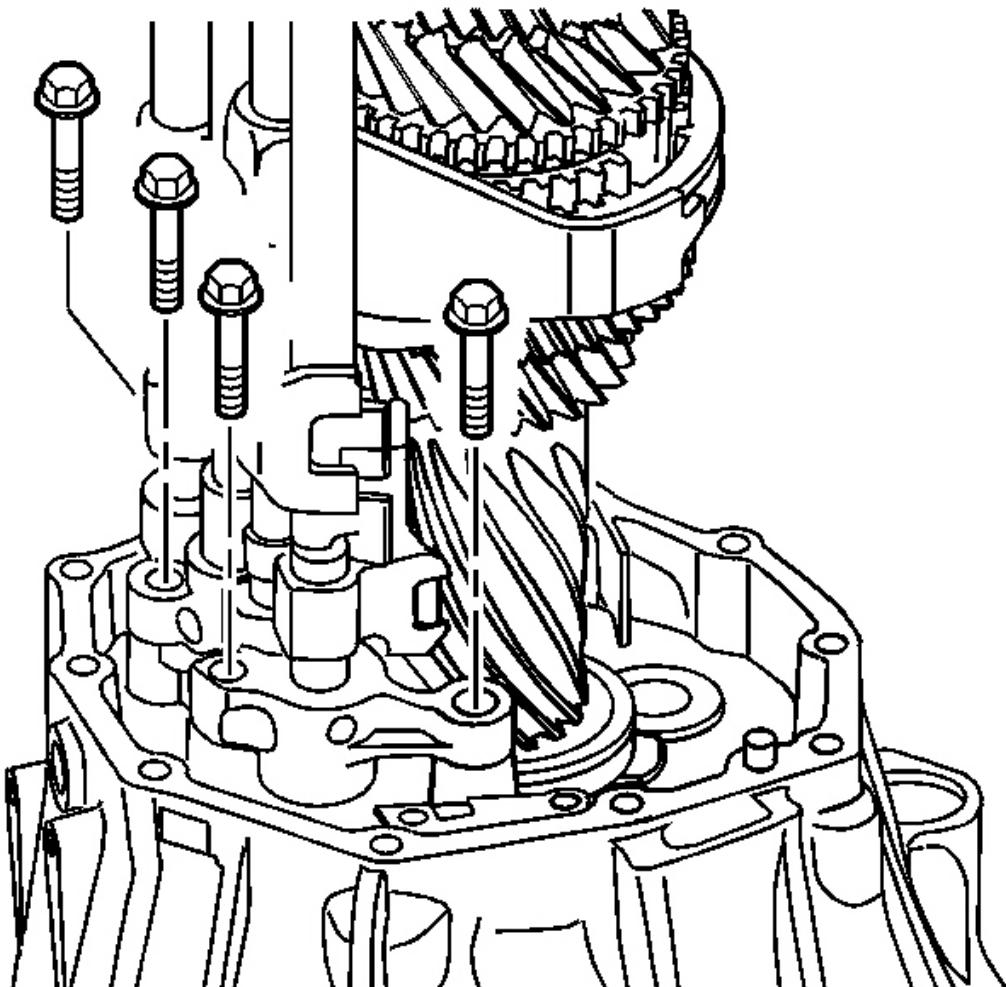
View Of Shift Counter Lever Bracket Bolts
